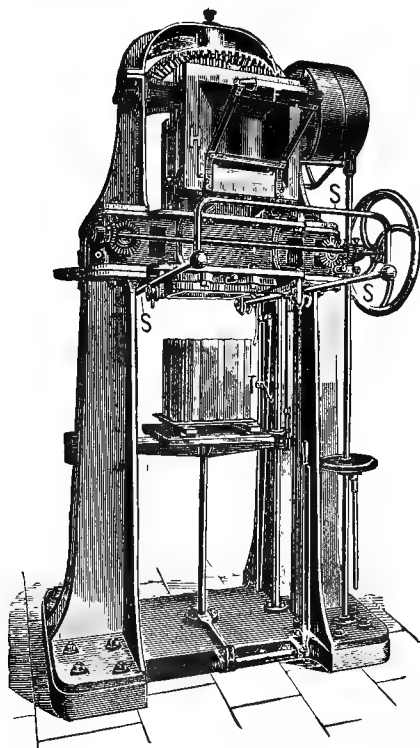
Joly & Foucart's self-contained continuously acting tile machine.
